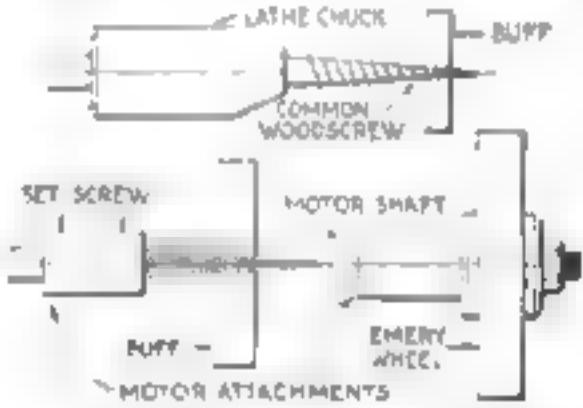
Attachments to fit the shaft of the ordinary electric motor permit you to turn it into a grinding, buffing or polishing head
